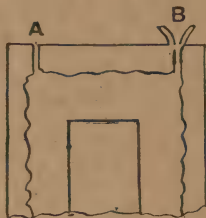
Picture-frame Mould with Pouring Gate and Riser
